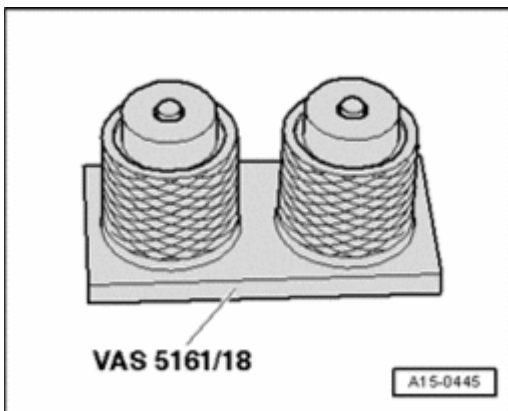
Identifying Installation Cartridge VAS 5161/8
